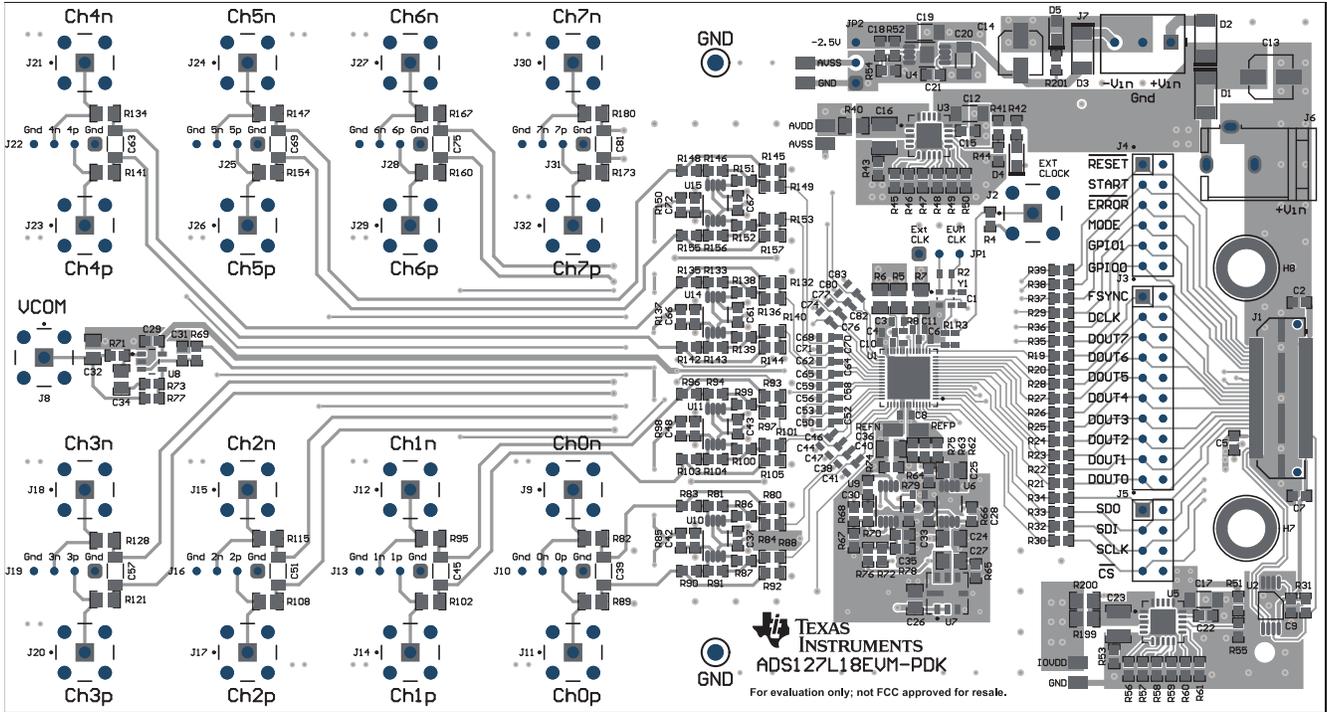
PCB Layout for the ADS127L18EVM (Top View)
